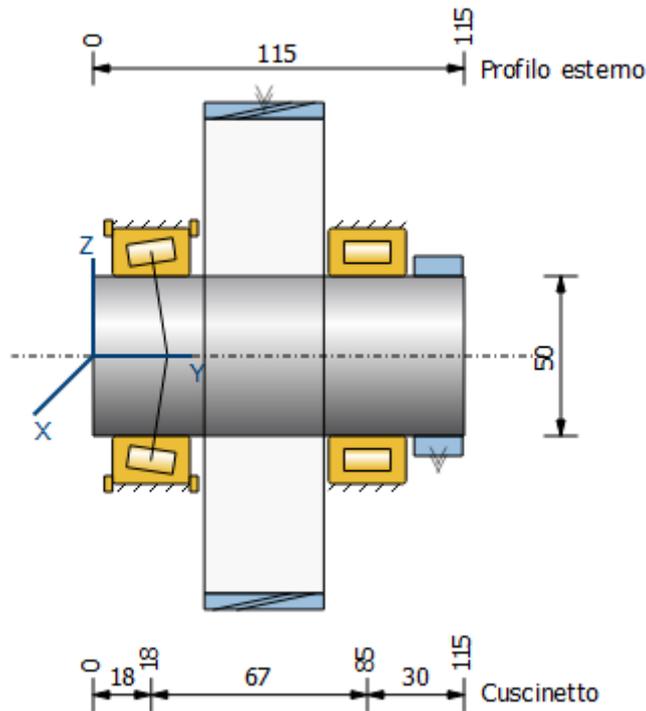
Sketch of the output shaft for the one-speed transmission
